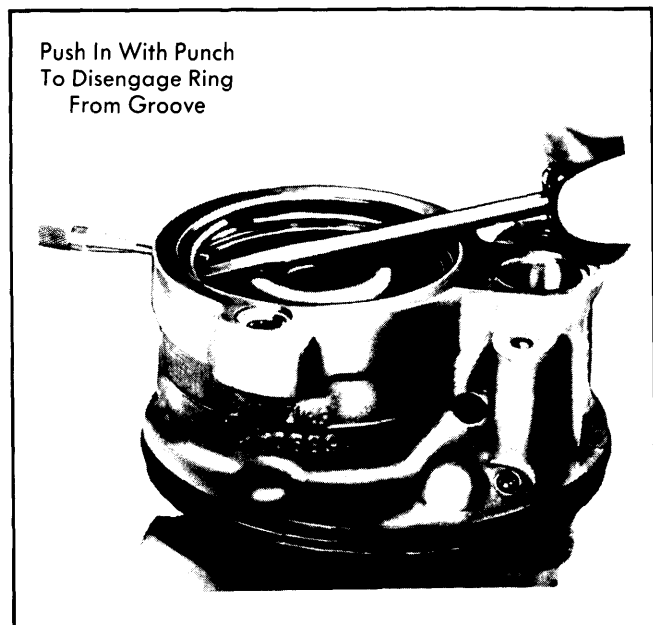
Disengaging and Removing Retaining Ring for End Plate of Pump
